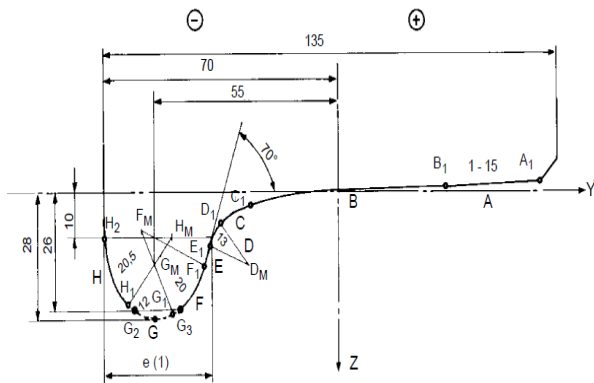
Geometry of standard wheel rim with 100-720 mm diameter [13]
